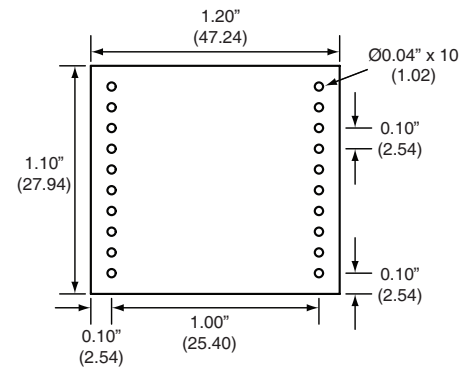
EVM-GPS-RM PCB Layout Dimensions
